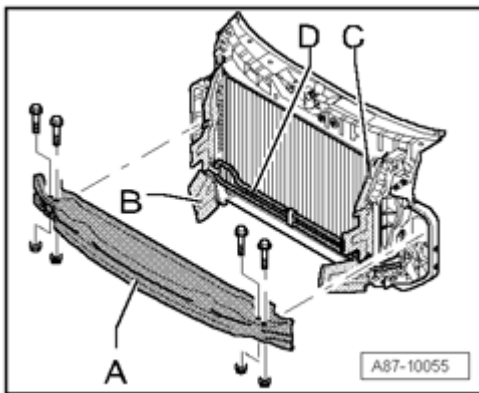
Identifying Air Duct And Mount For Bumper Cover
